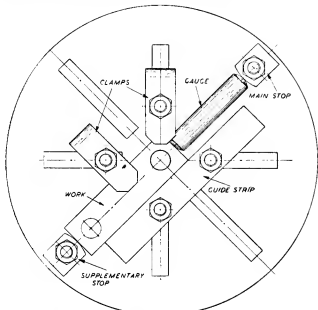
Method of setting up the cross-bars to drill holes for slide bars.
